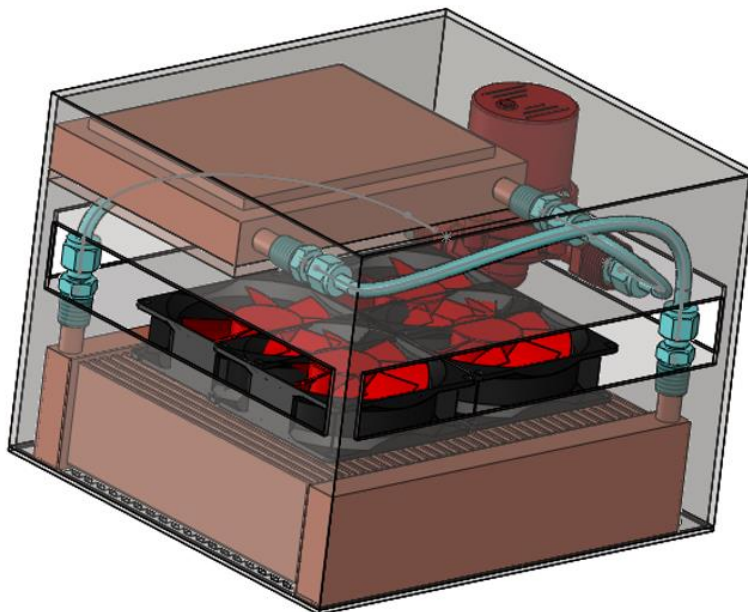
Part Dimensions: Cooling module enclosure. Use for reference purpose only, this is not a complete engineering drawing.
